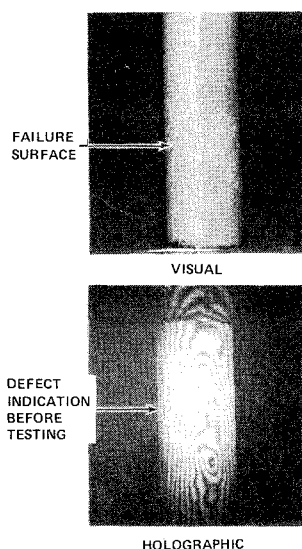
Holographic inspection detected a defect in the composite tube, which ultimately resulted in fatigue fracture.
